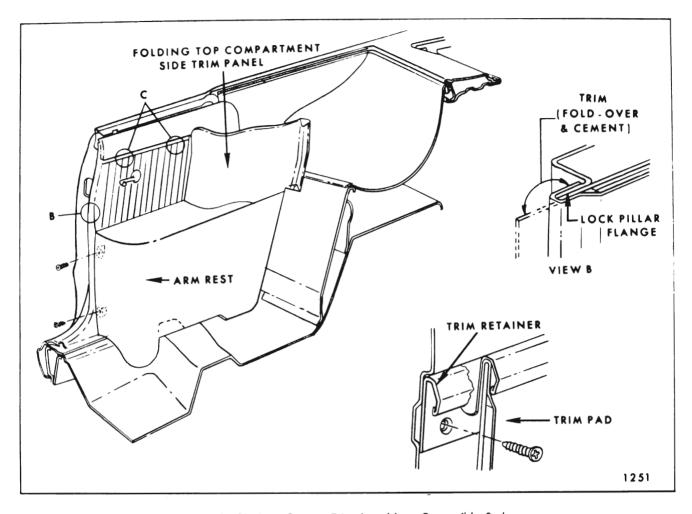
Rear Quarter Trim Assembly - Convertible Styles
